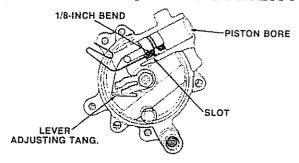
MODEL 2300 ELECTRIC AUTOMATIC CHOKE PLATE CLEARANCE (PULLDOWN) ADJUSTMENT
